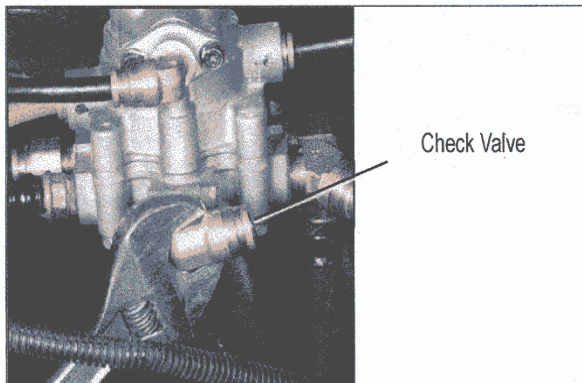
INSTALLING THE EXTERNAL CHECK VALVE
